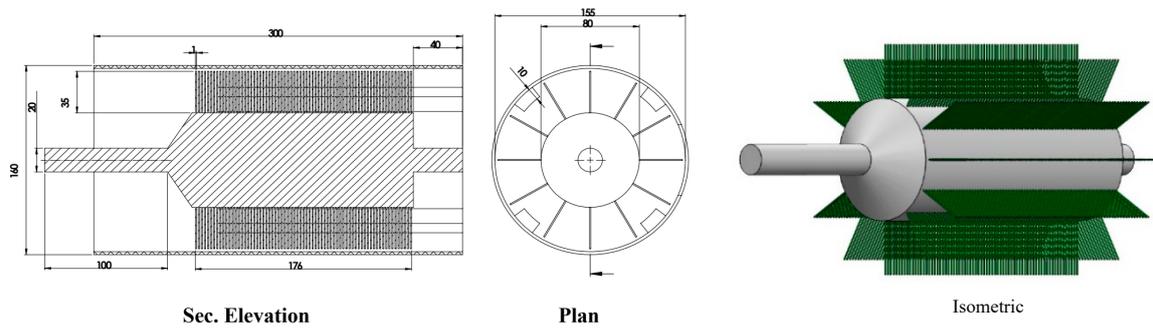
Elevation, plan, and isometric of the peeling chamber. Dims, mm.
